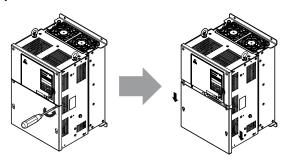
Removing the Terminal Cover on an IP00/Open Type Enclosure Drive
